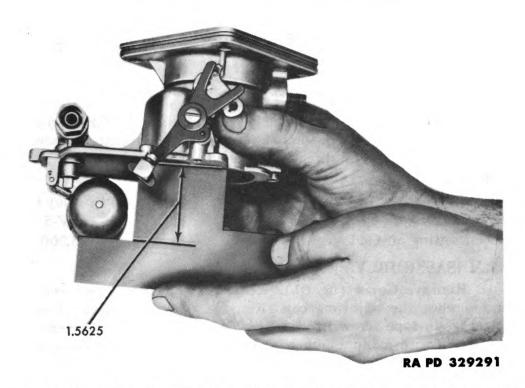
Checking Carburetor Float With Fuel Inlet Needle Open
